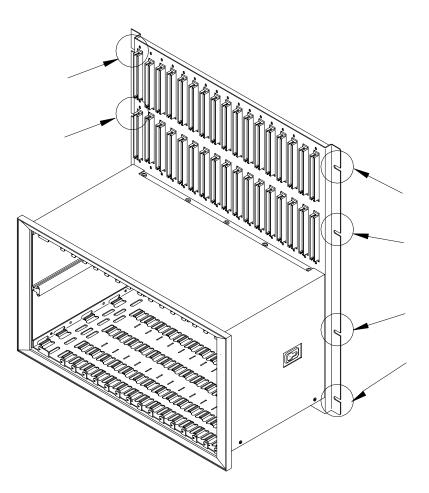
Dimensions of a Bulkhead Mount 3500 rack
